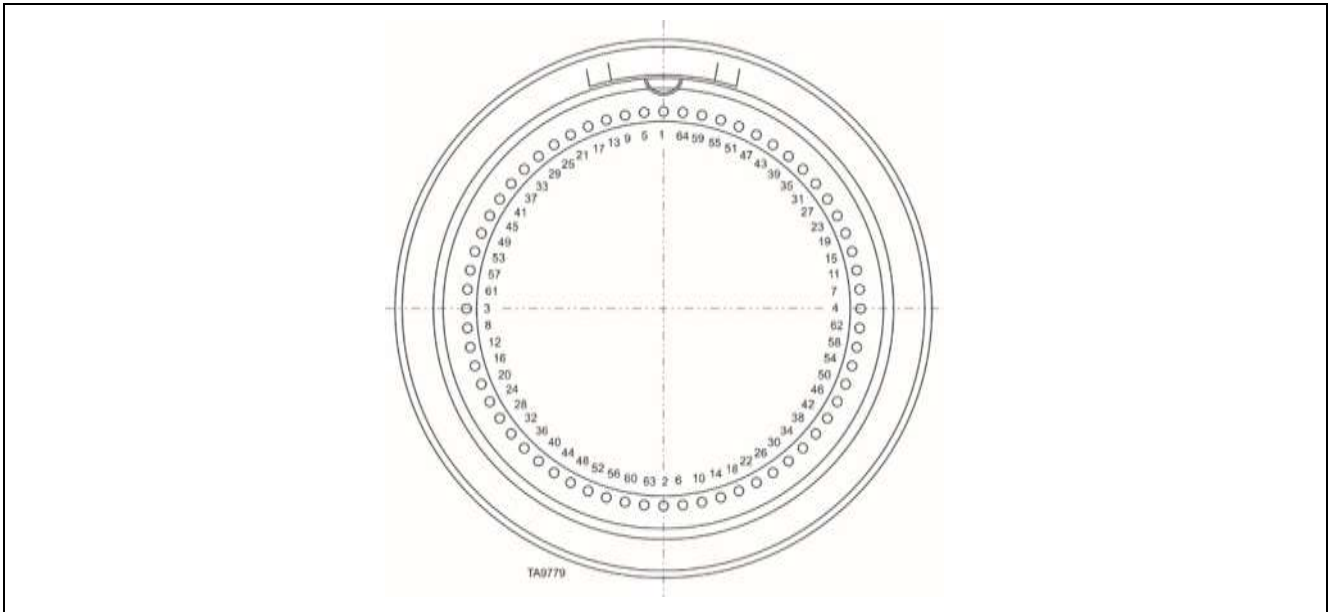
L-1350-L-1850-L-2350 wheel capscrew installation torque pattern – models 51 and 57 planetary drive
